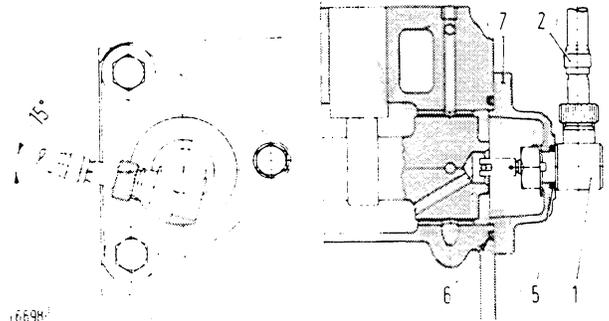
Refitting the Tacho-hourmeter Angle Drive
